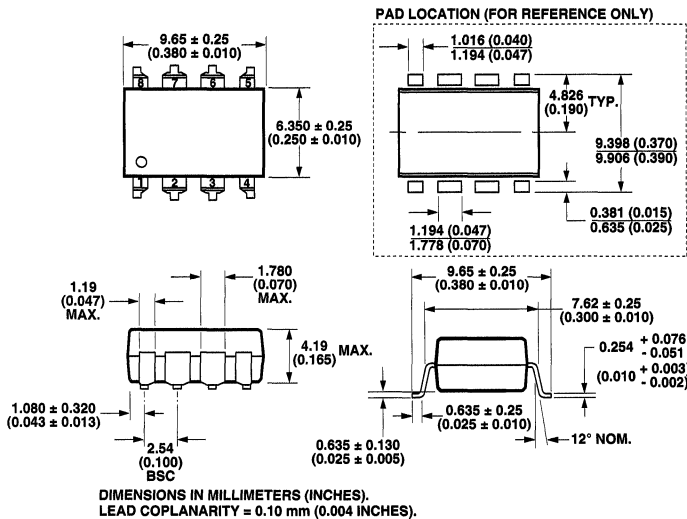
HCPL-4506 Gull Wing Surface Mount Option #300 Outline Drawing.
